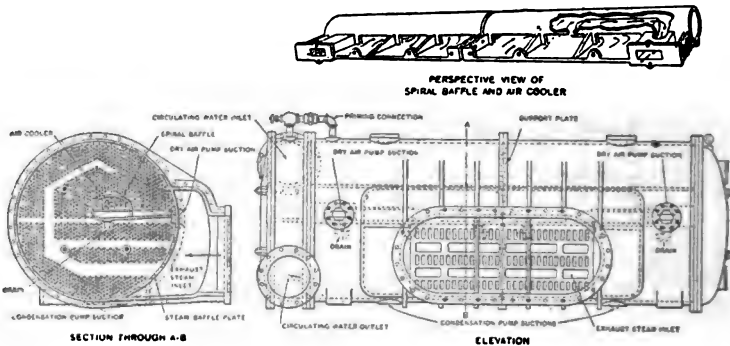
CYLINDRICAL CONDENSER OF GOOD DESIGN.
